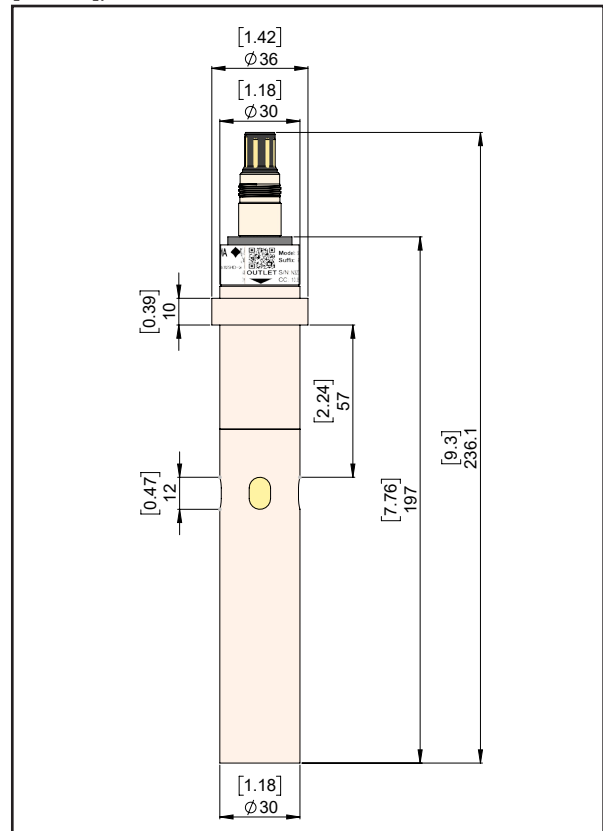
Dimensions of SC42 SP34 / SK34 (in mm [inches])
